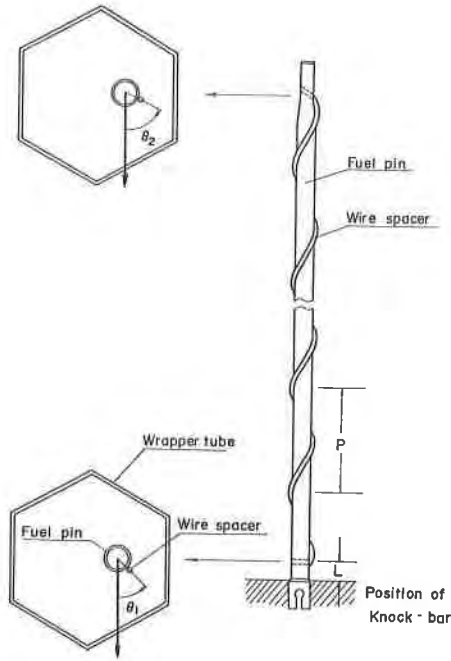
Configurations of Fuel Pin with Wire Spacer and its Cross Section in a Wrapper Tube
